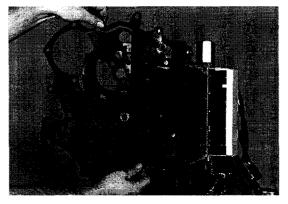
Position spacer to converter housing gasket on spacer. A light coat of grease will hold gasket in place.
